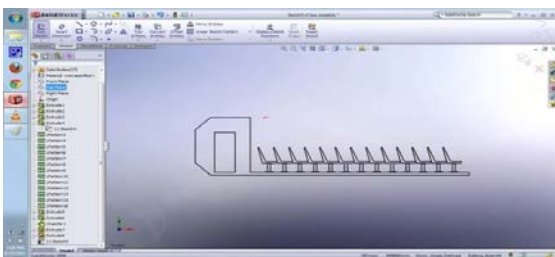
Modification of Seat Arrangement in Bus - Front View- Wire Frame
